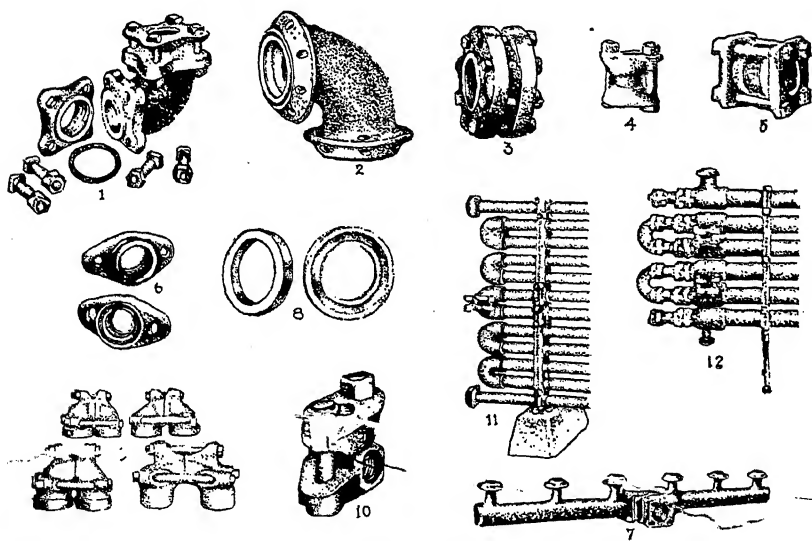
Typical pipe fittings for ammonia refrigerating system: (1) flanged elbow; (2) ground-joint bolted elbow; (3) bolted pipe flanges; (4 and 5) ground-joint union; (6) oval flanges; (7) branch tee or header; (8) joint rings; (9) split return bends; (10) oval flanged elbow; (11) solid and flanged return bends; (12) double-pipe connections for brine cooler.
